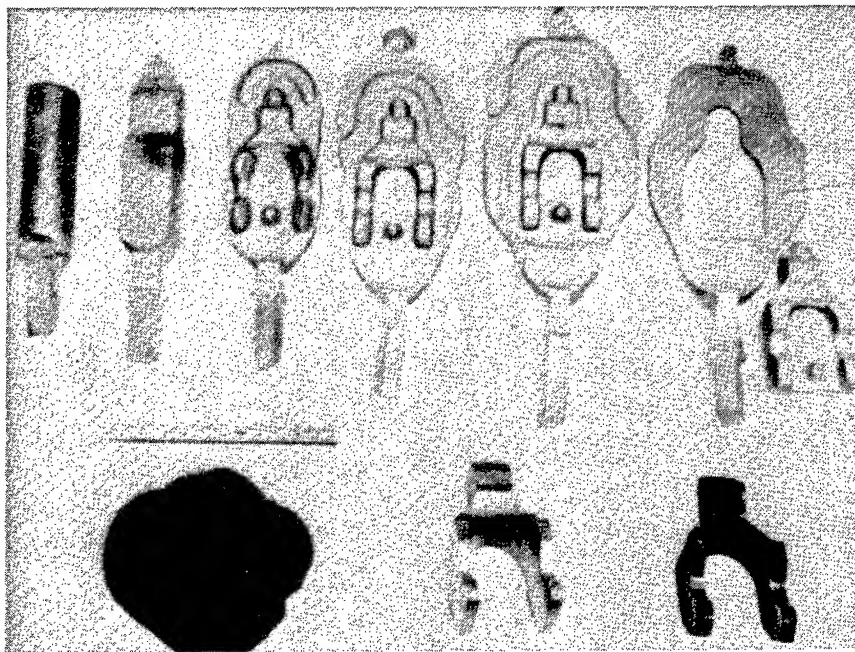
Pictorial comparison of conventional forging and P/M forging processes for producing forged accelerator
